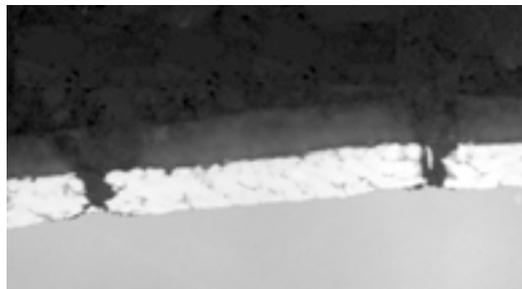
Cross section of roll formed bend (0.42mm bmt) with cracking of painted and metallic coatings.
